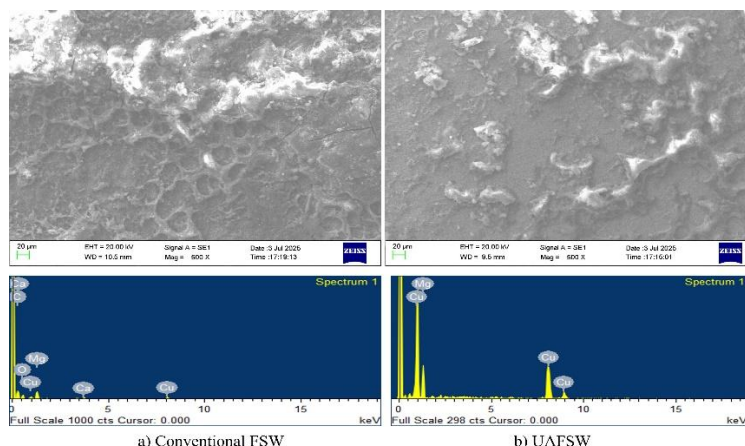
SEM fractography and corresponding EDS spectra of the fractured Cu–AZ31B Mg dissimilar joints fabricated by (a) conventional FSW and (b) UAFSW after tensile testing.
